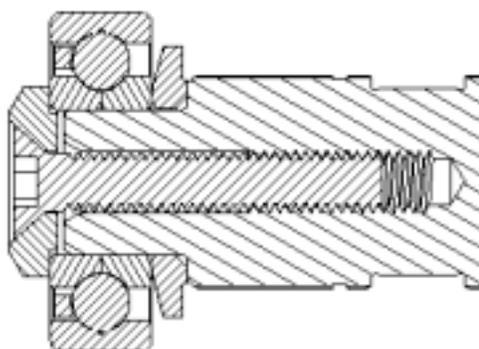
Four point bearing assembly on counter shaft end with Torx screw
